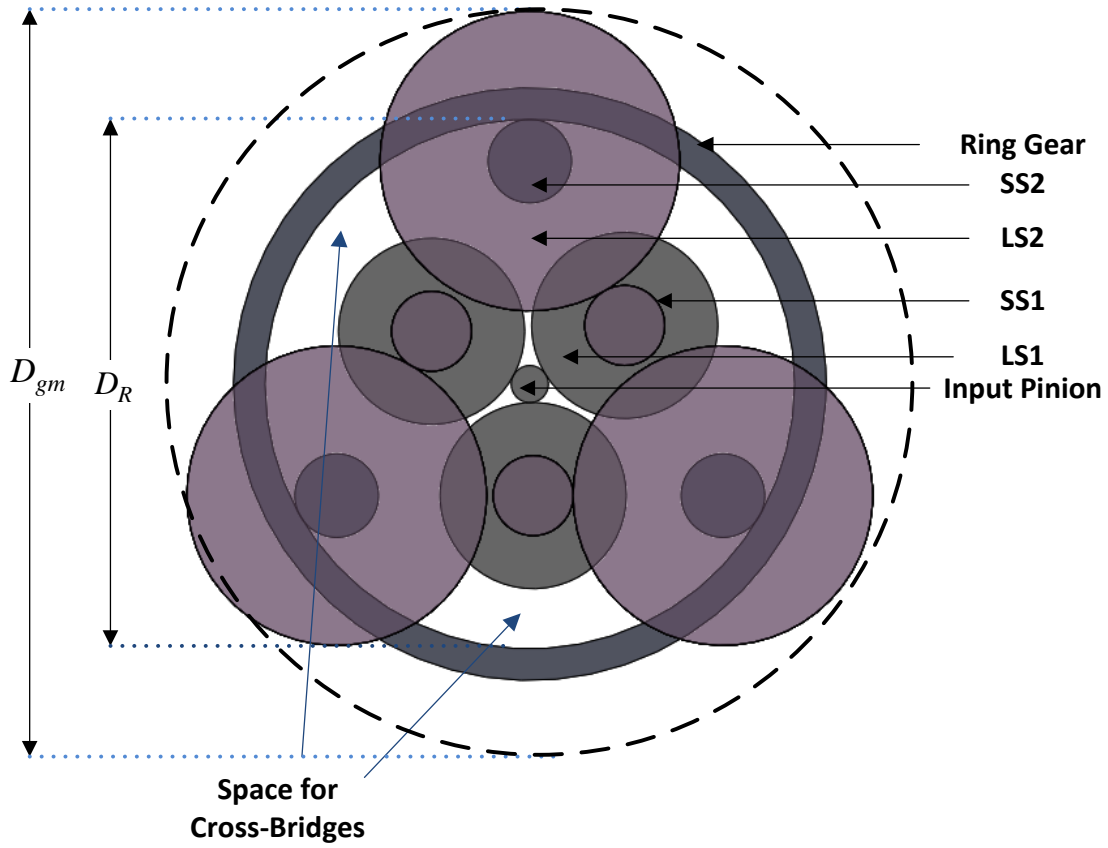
Layout of gears in a P-Type 2-Stage SCGT (3)
